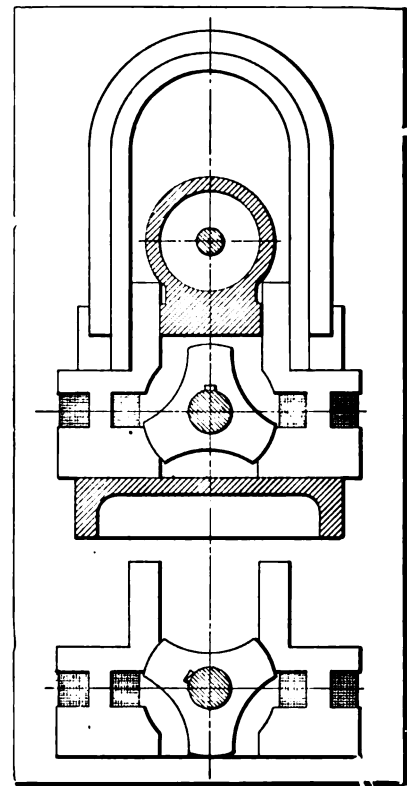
Cross-section of a rotor type of magneto with fixed coils embedded in the soft pole pieces, eliminating the use of wire on the moving parts
